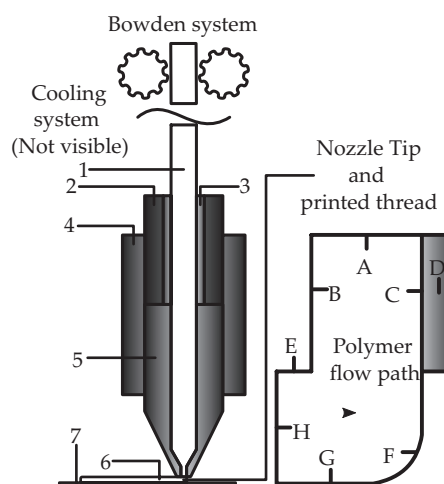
Bowden system for common used 3D printers, 1) filament, 2) heat break, 3) Teflon tube guiding tube PTFE (Teflon tube), 4) heat block, 5) nozzle, 6) printed thread, 7) printing bed
